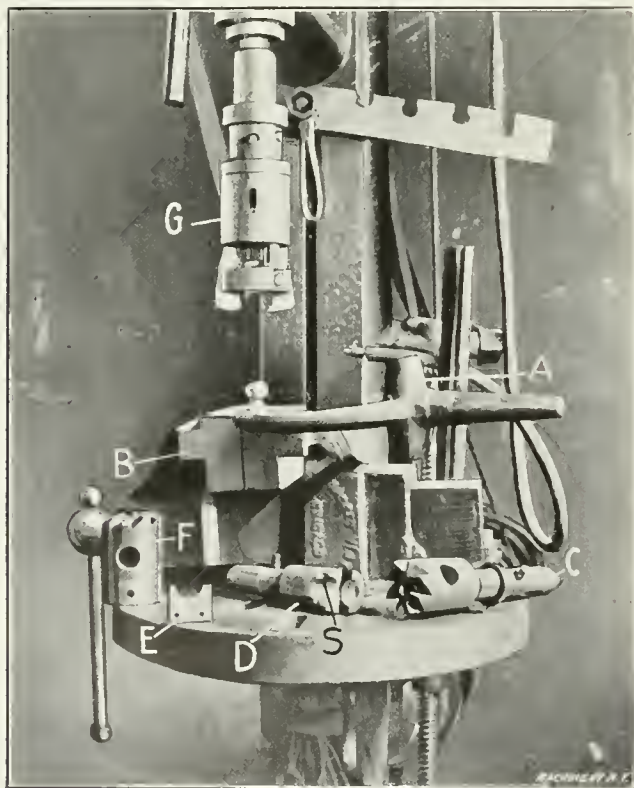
Fixture used on the Drill Press for Turning Tops of Steering-spindle Balls
